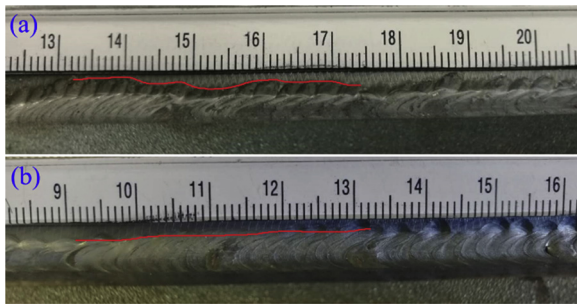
The solid red line shows the outline of weld bead (a) from manual welding (b) from human-robot collaborative welding. (For interpretation of the references to colour in this figure legend, the reader is referred to the web version of this article).
